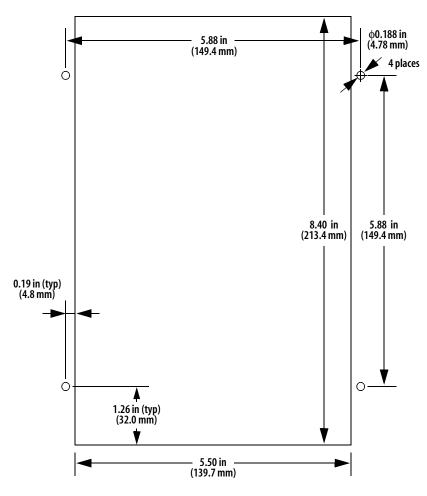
SEL-701-1 Monitor Cut and Drill Dimensions.
